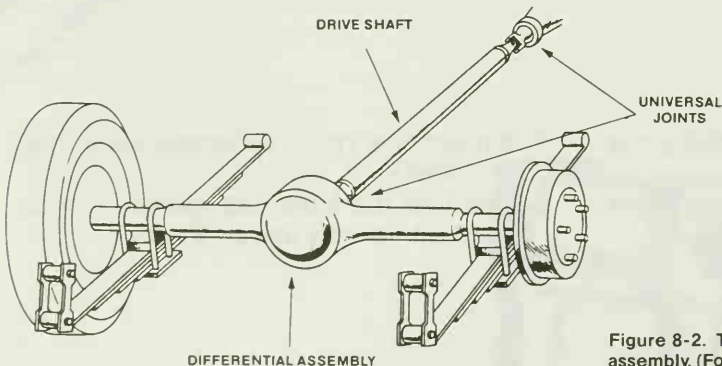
The drive shaft is exposed in a Hotchkiss drive assembly. (Ford Motor Company)
